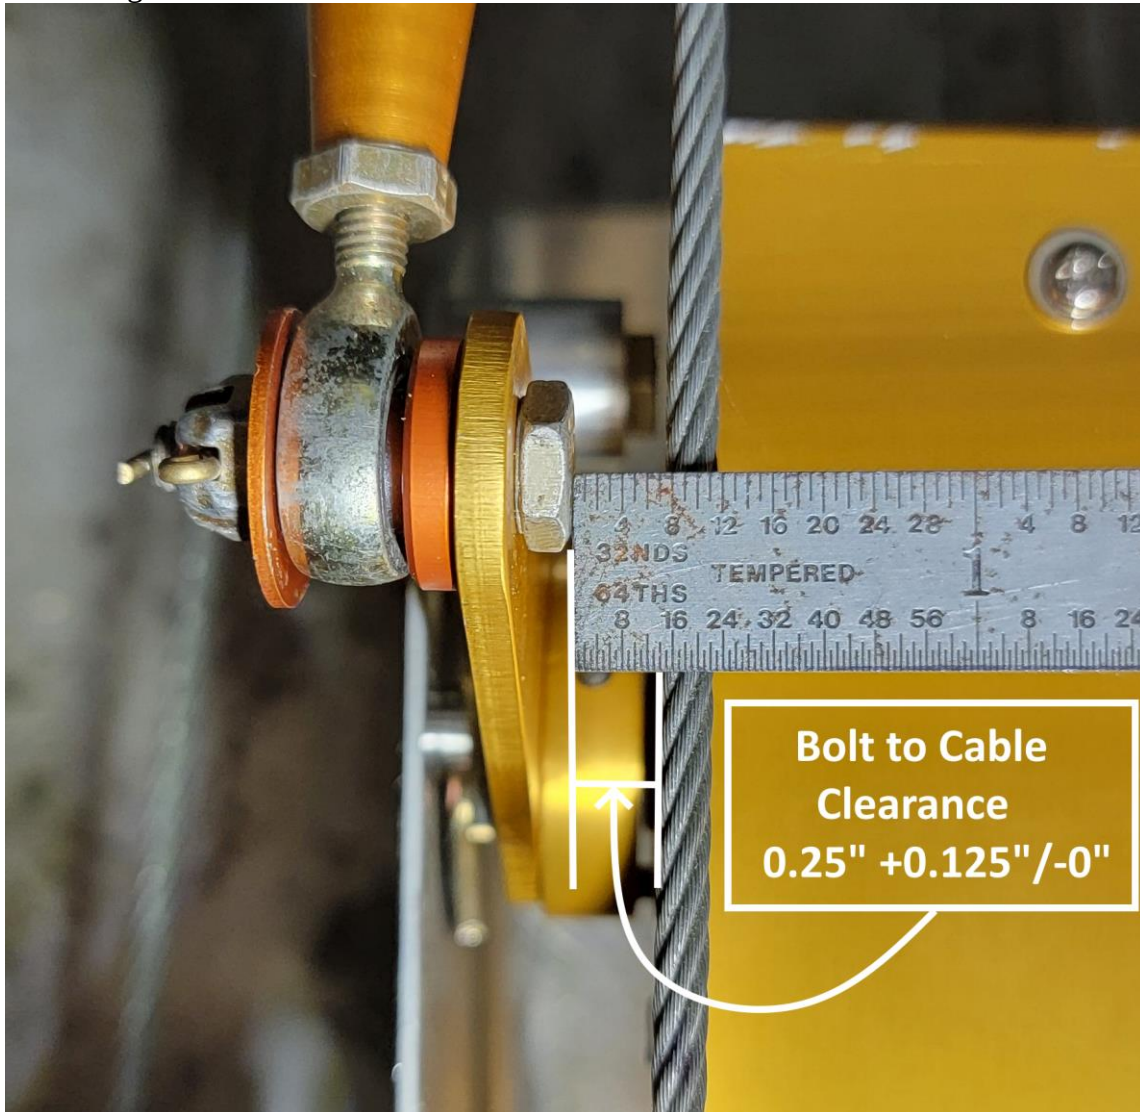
BOLT TO CABLE CLEARANCE
